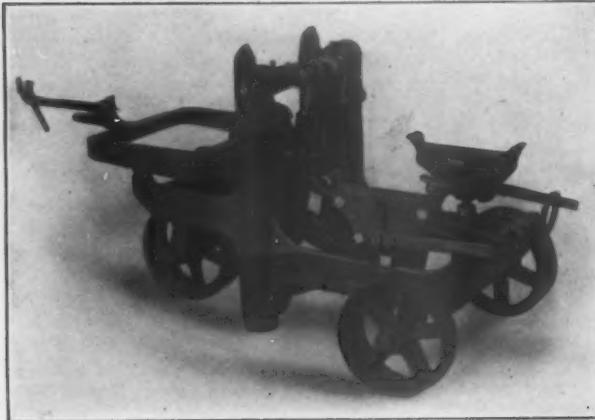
The Turn-Over Molding Machine Built by the International Molding Machine Company, Chicago, Ill.
